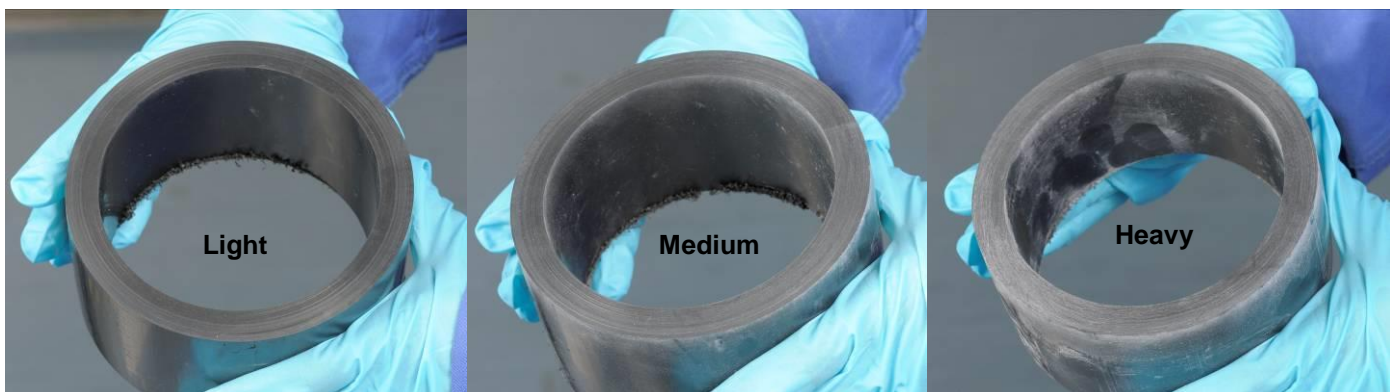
Standard talc-contaminated pipe samples for butt fusion welding.
